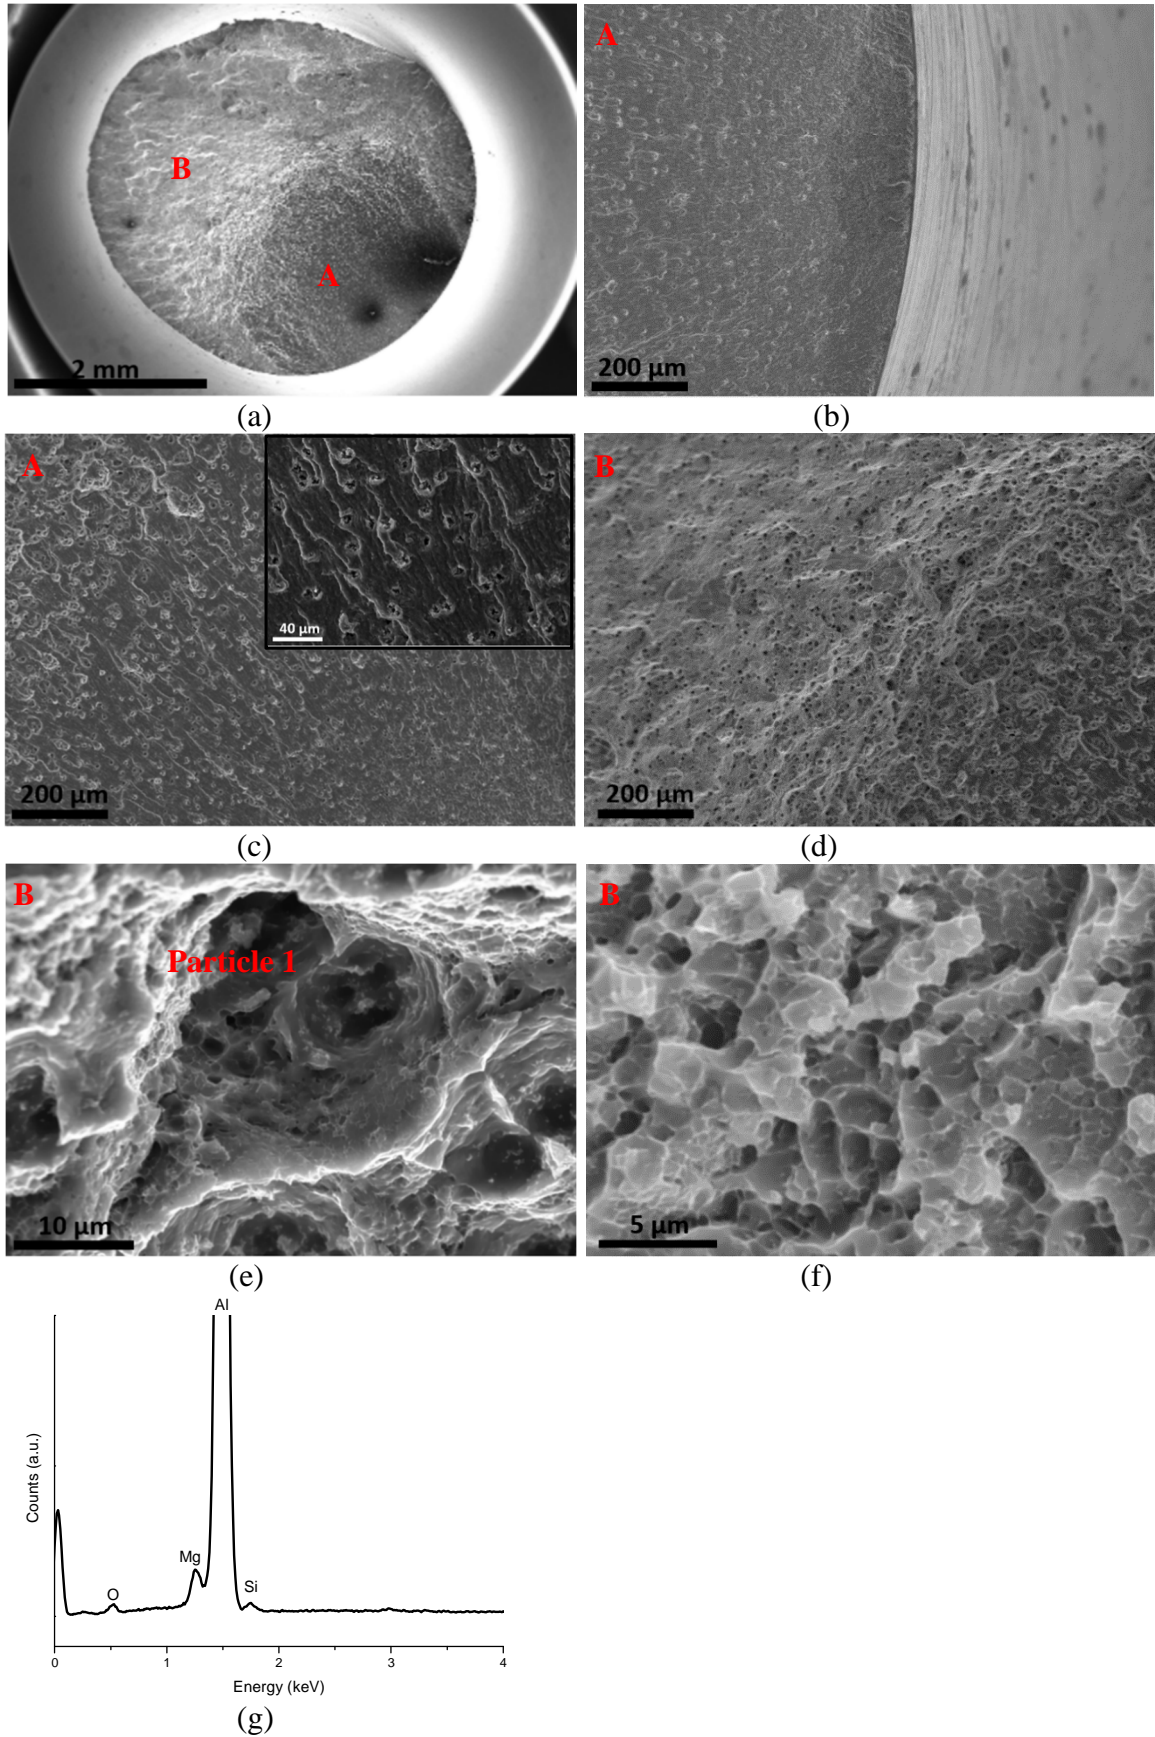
shows the fracture surface of aging heat treated 6061Al alloy tested at a maximum load level of 220MPa. Figure 4.18(a) is the overview of the fracture surface showing limited flat regions corresponding to fatigue crack initiation and stable growth (region A) and tortuous ridges associated with rapid dimpled fracture (region B). Typical fatigue fracture surfaces at region A are
